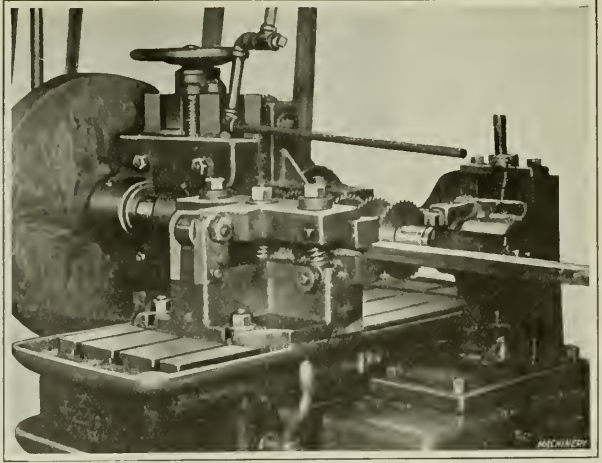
Cutting Bar Stock into Blanks on a Milling Machine equipped with Multiple Saws and a Holding Fixture
